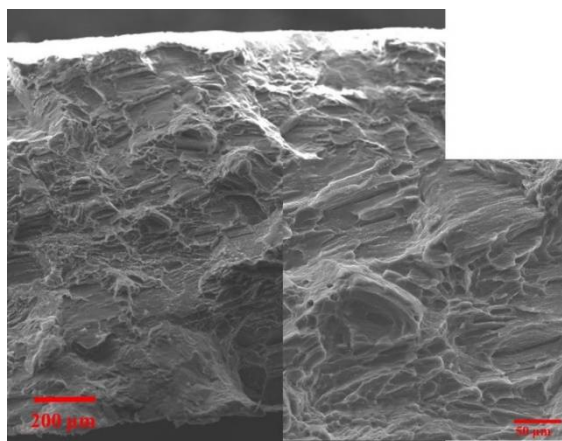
Tensile fracture surfaces of AZ31 Mg alloy
